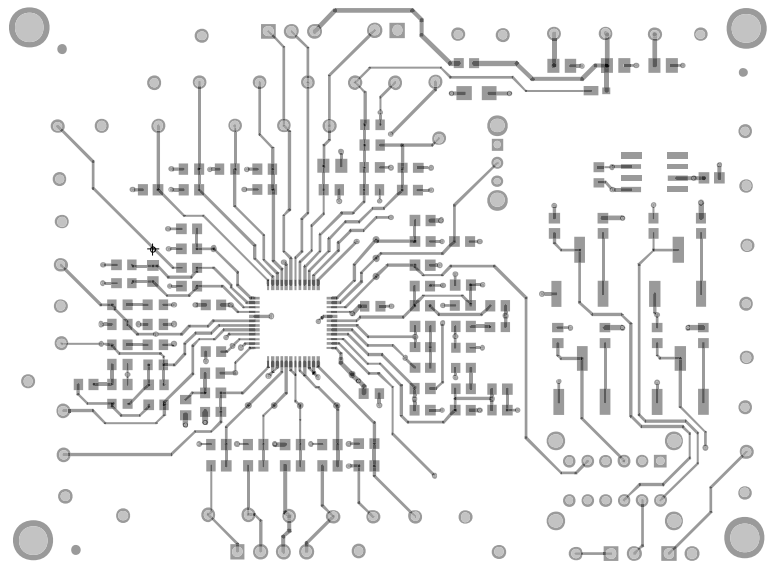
AD8452-EVALZ Primary Side—All Components Located on This Side
